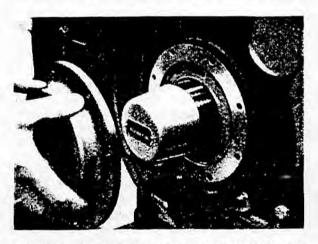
GUIDING REAR OIL SEAL AND COVERASSEMBLY ON TO CRANKSHAFT WITH SERVICE TOOL MF105C/1
